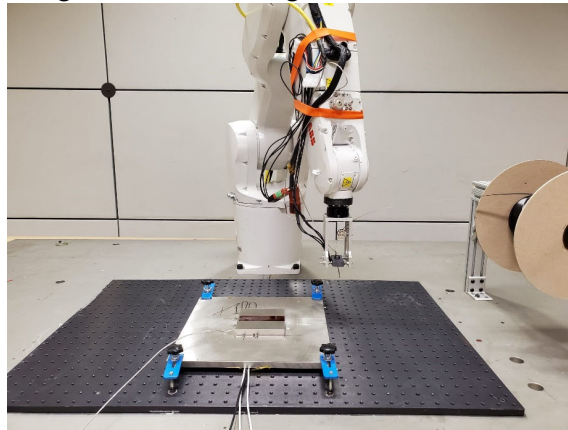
A robotic 3D printer with custom-built head for processing PAEK-CF.
